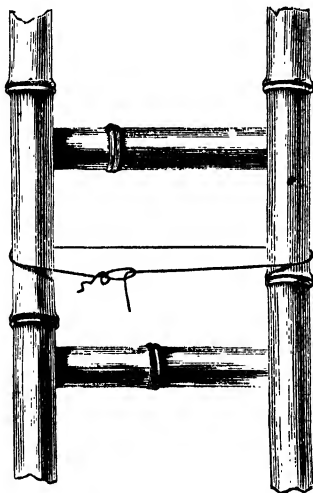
Method of Cramping Joints in Bamboo Work.
